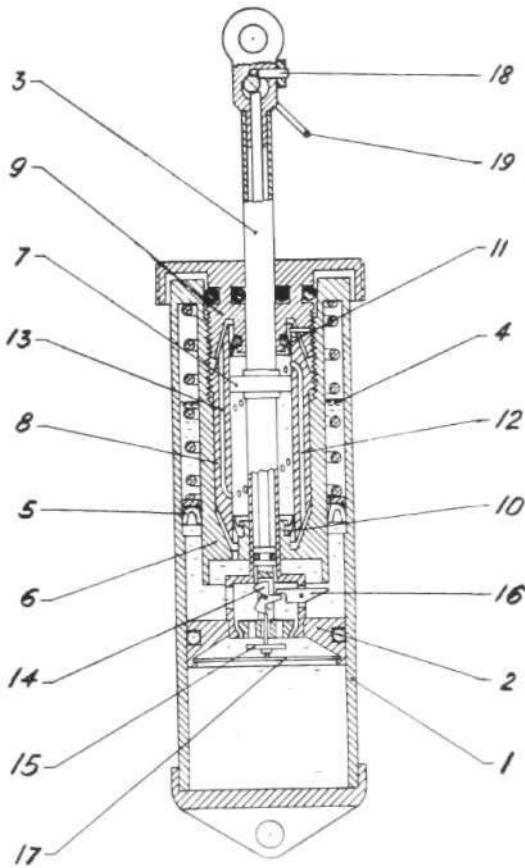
Henschke-Mauch "Hydraulik" Model "A" (Swing and Stance Control) Unit. 1, Cylinder; 2, piston; 3, piston rod; 4, hydraulic fluid; 5, accumulator piston; 6, dashpot; 7, dashpot piston; 8, control bushing; 9, swing adjustment screw; 10 and 11, check valves; 12 and 13, channels; 14, pendulum; 15, valve; 16, counterweight; 17, spring; 18, stance adjustment screw; 19, selector switch.
